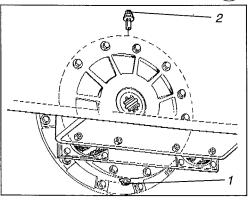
Drum, right side 1 Drain/Filler plug 2 Level plug
